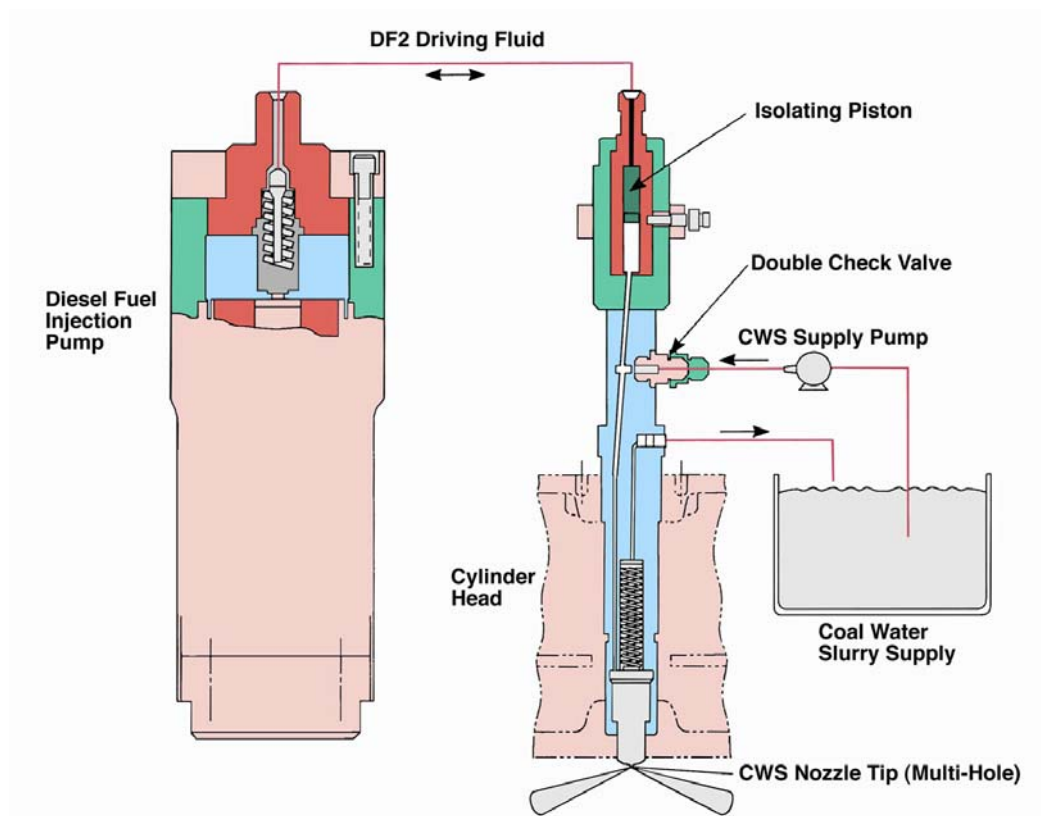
General Layout of CWF Injection System with Shuttle Piston
